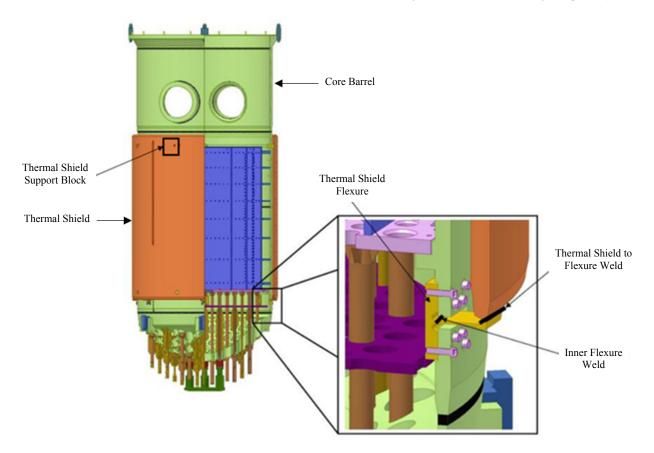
Typical Westinghouse PWR 4-Loop Thermal Shield Layout
